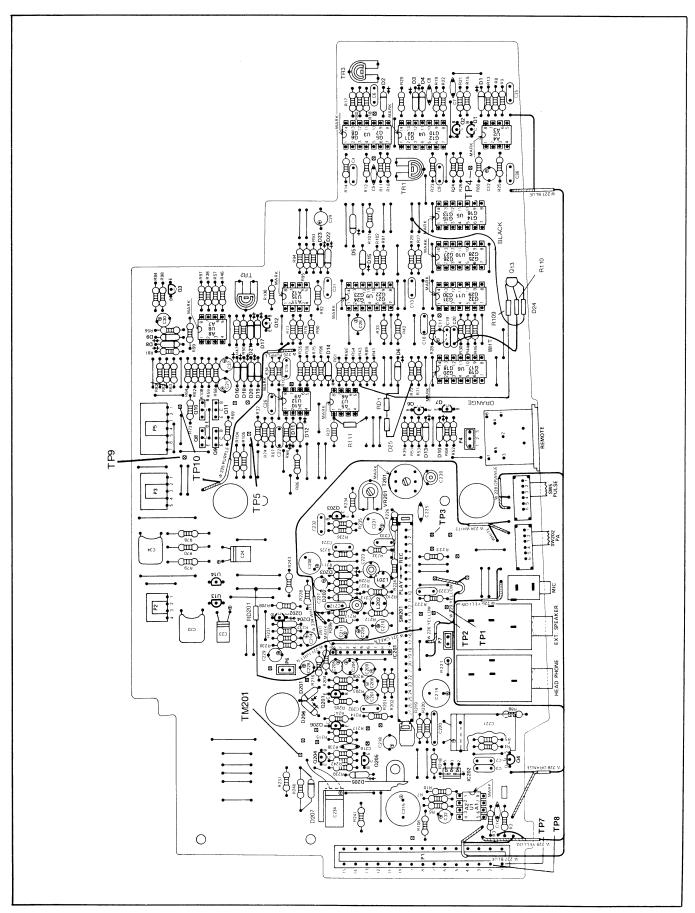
Figure BA. Tray Motor and Digital Filter Test Points (Component Side, Main PC Board)
